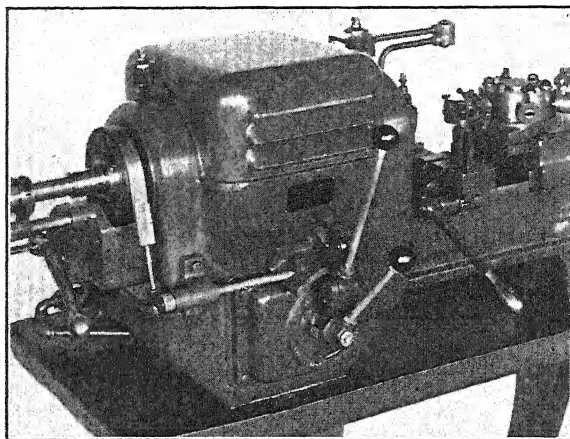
A View of the Headstock of the New No. 1 Motor-Spindle Warner and Swasey Ram-Type Turret Lathe.
